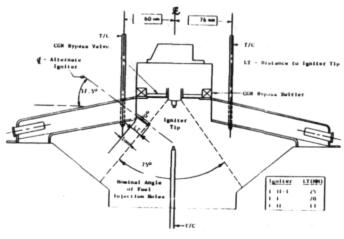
Mod I Combustor Showing Alternate Igniter/Thermocouple Locations
